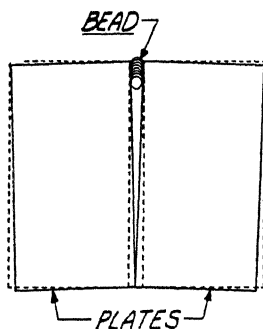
Position of plates before welding is indicated by dotted lines. Solid lines show position after welding.
